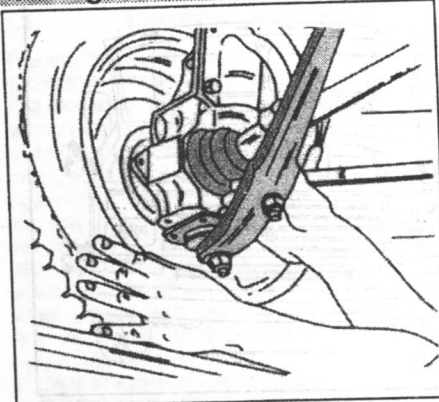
Pull the suspension arm downwards, at the same time pushing the wheel towards the outside until the drive shaft can be fully withdrawn from the gearbox.
